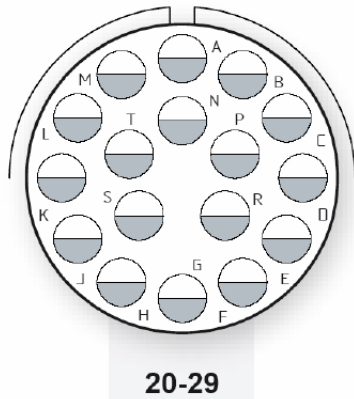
External View of Connector Pin-out (Socket) in SF910i
